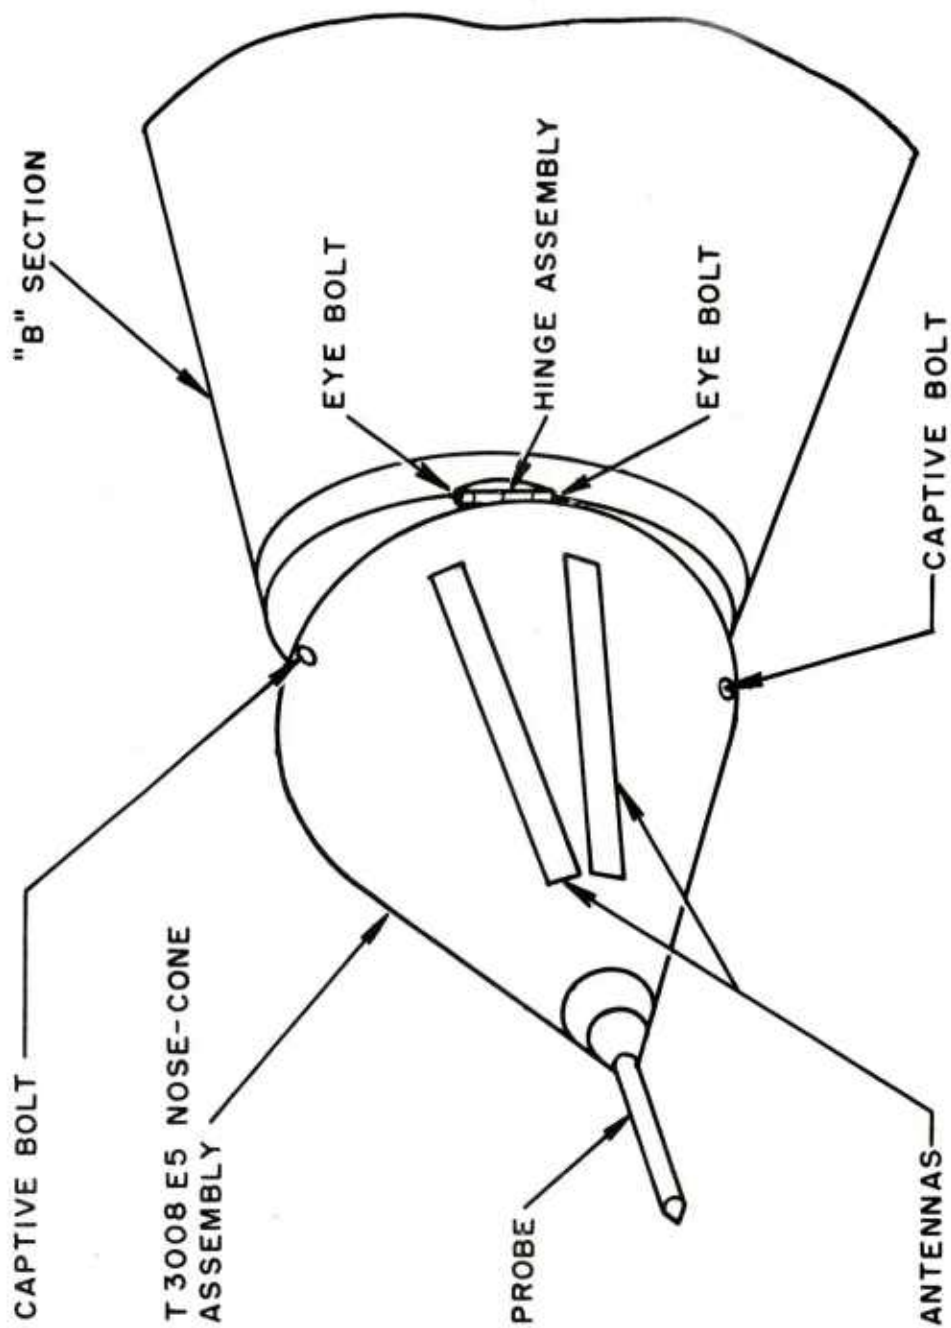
Method of attaching the T3008E5 nose-cone assembly to "B" section.
